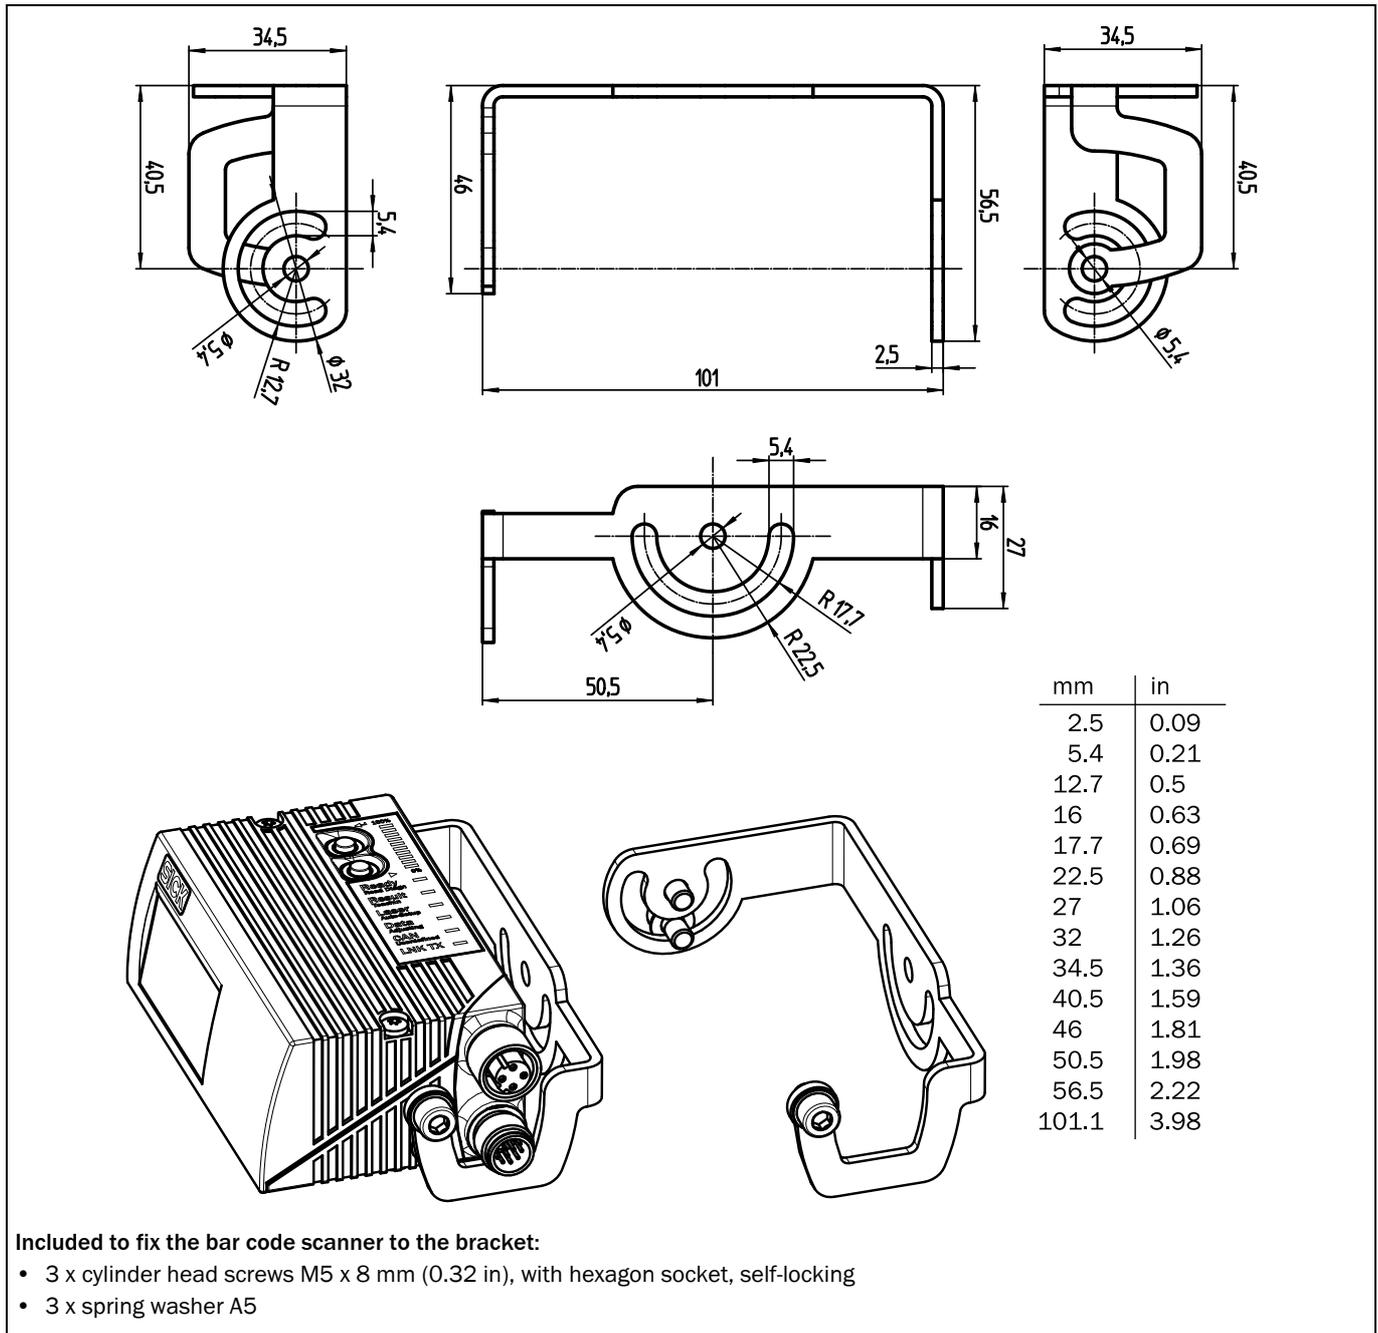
Dimensions of the fixing bracket no. 2042800
